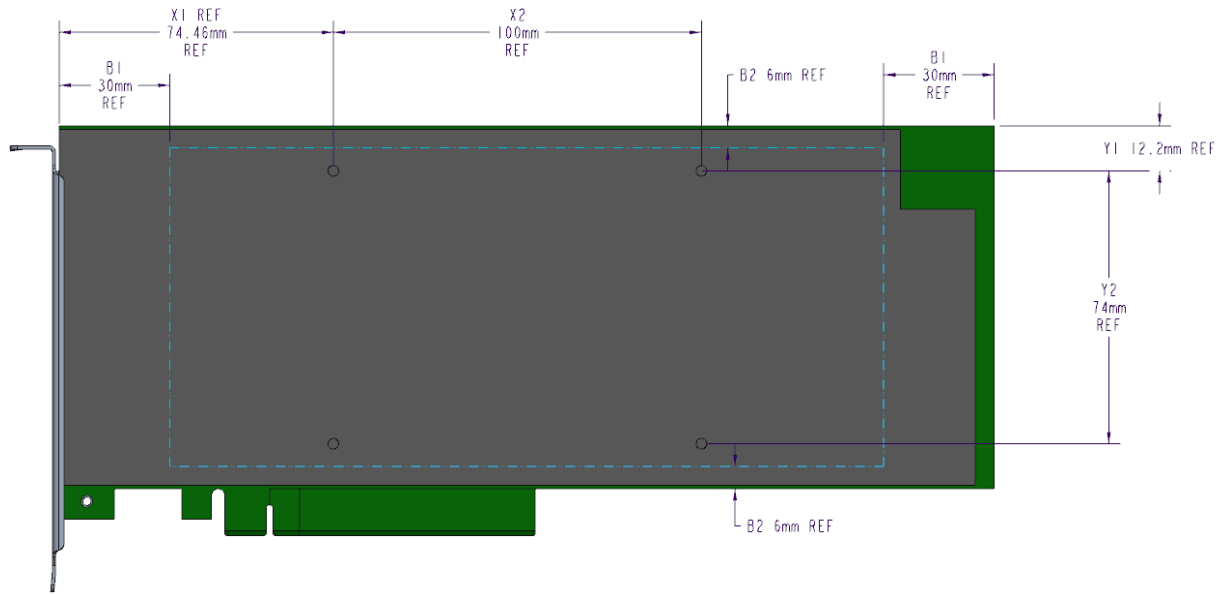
Example Add-in Card Mounting Hole and Boundary Definition
